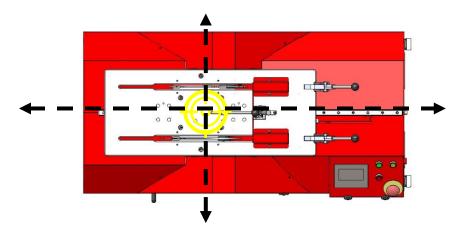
Place bubble level on top of linear table at position shown to level machine in both axes.
